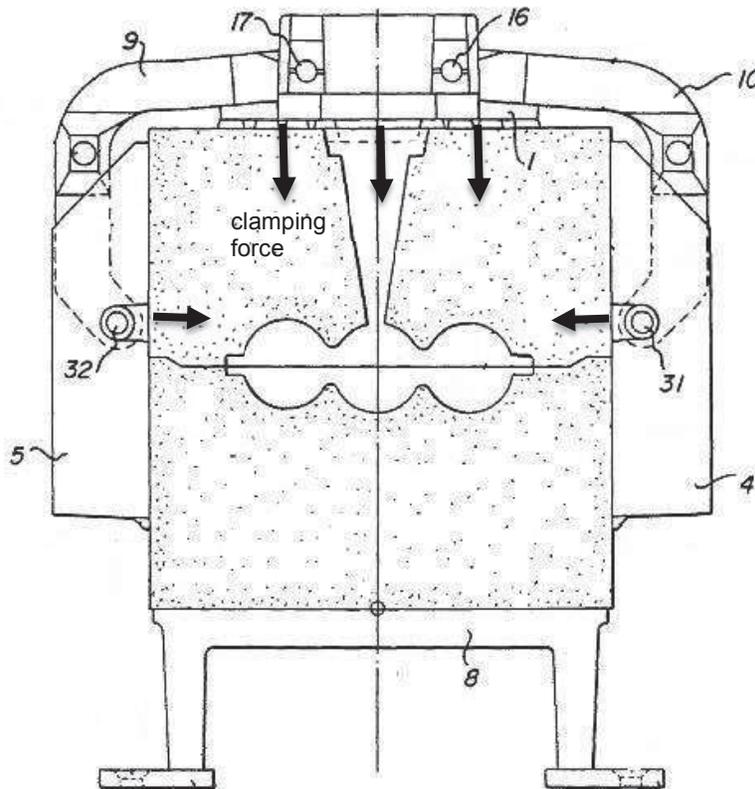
Apparatus for weighting and lateral support of box-less sand mold parts. Adapted from [7].
